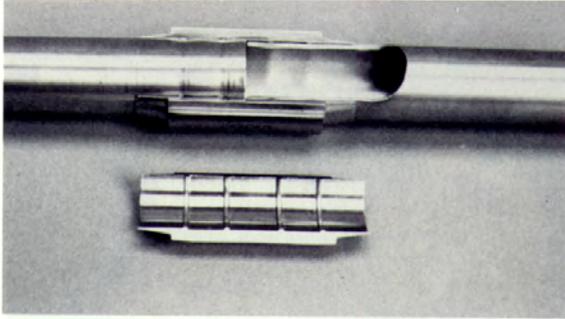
A photograph showing a cut-away section of Cryofit hydraulic fluid coupling.
